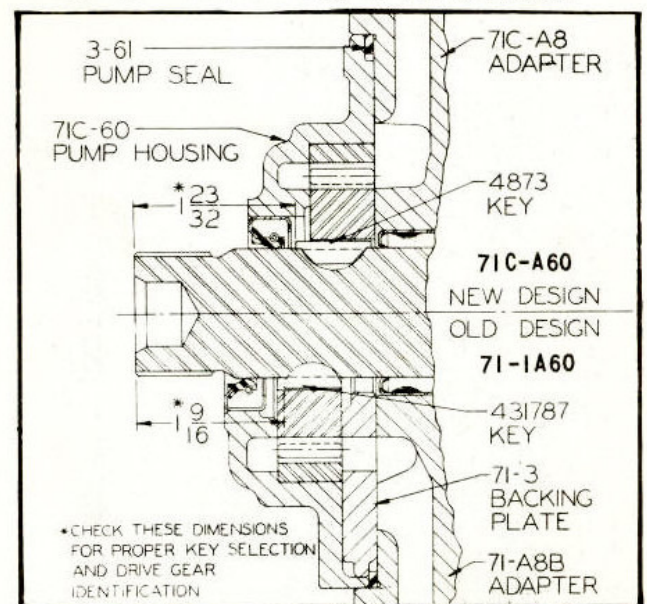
Illustration of the Installation of the Two Types of Pump Assemblies and Their Related Parts
